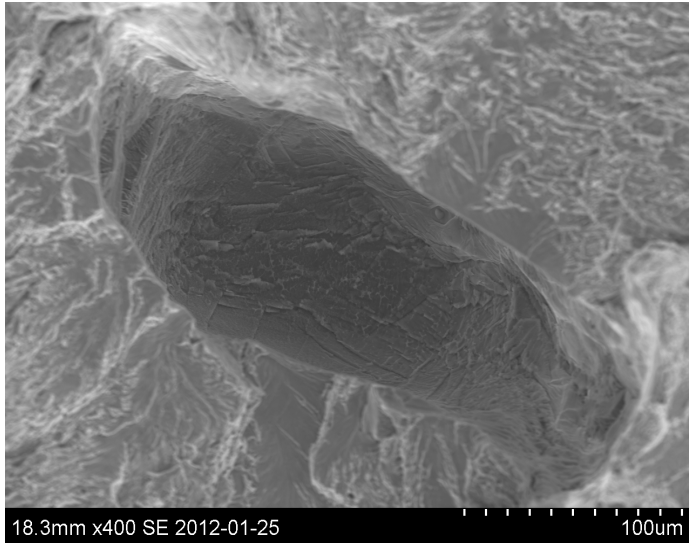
Inclusion in 7Ni\_weld at 20°C
